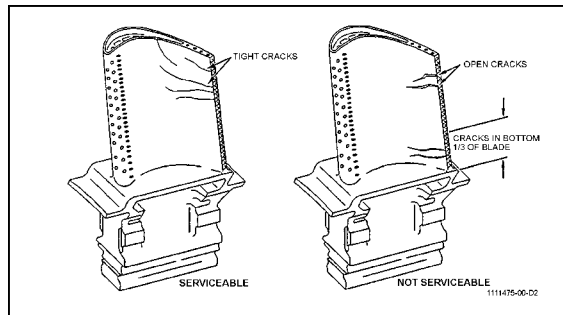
Cracks at Stage 1 Blade Trailing Edge
